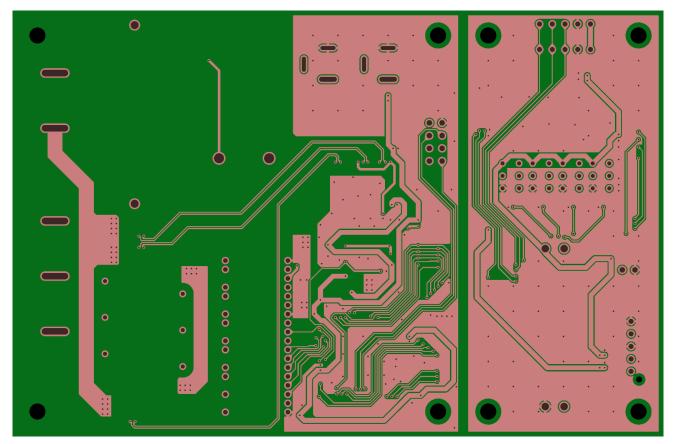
shows the PCB pattern diagrams of this reference design.
